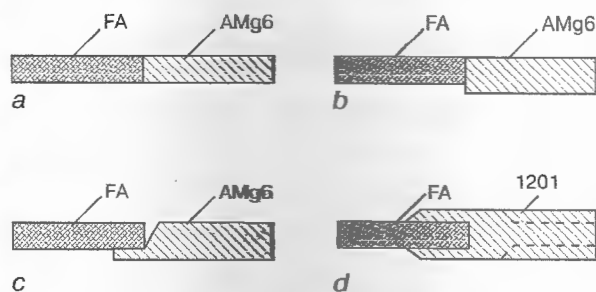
Schematics of edge preparation in arc welding (*a* – *c*) and electron beam welding (*d*) of foam aluminium to series-produced aluminium alloys.
